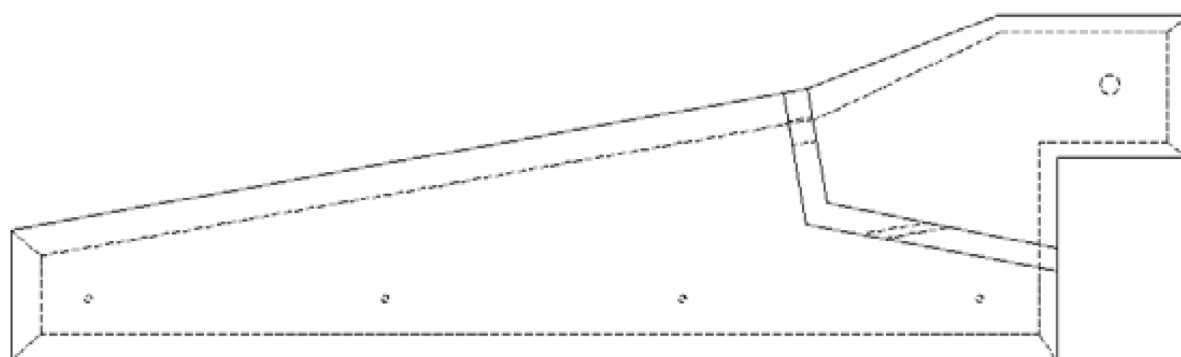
Schematic diagram of internal structure of tundish new retaining wall
